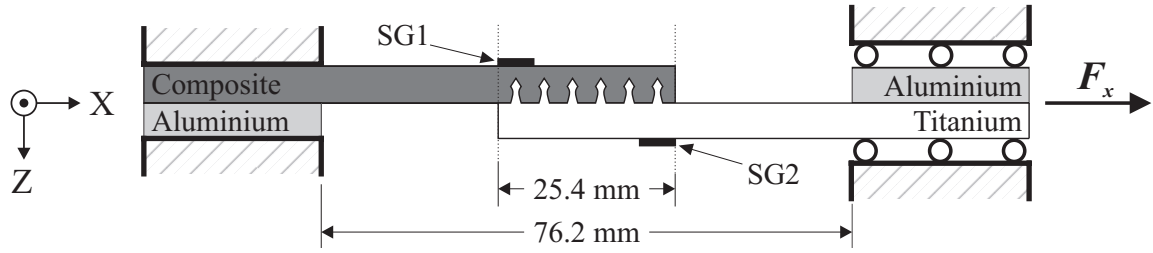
Section of a test coupon showing pins. Strain gauges (SG1-2) are positioned on the mid-line of the specimen, aligned with (and perpendicular to) the edges of overlap. All dimensions in mm, not to scale.
